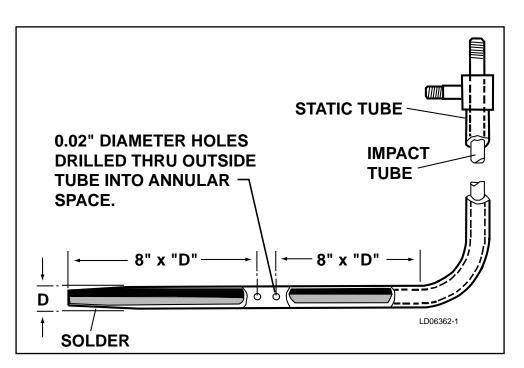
CONSTRUCTION OF PITOT TUBE
